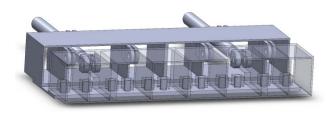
A close-up of the folding mechanism showing the two electric actuators
